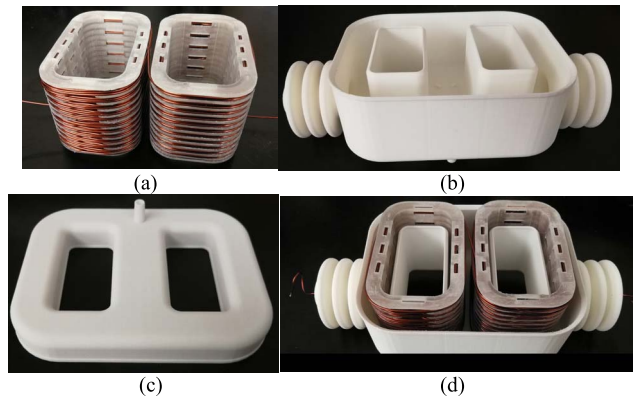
Winding building (a) winding; (b) winding case; (c) winding case lid; and (d) assembly of the winding and the case.
